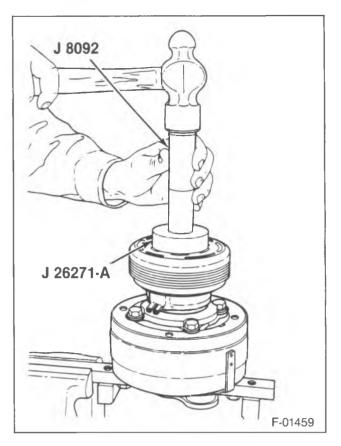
Installing the Rotor and Bearing Assembly — Poly-Groove Type
